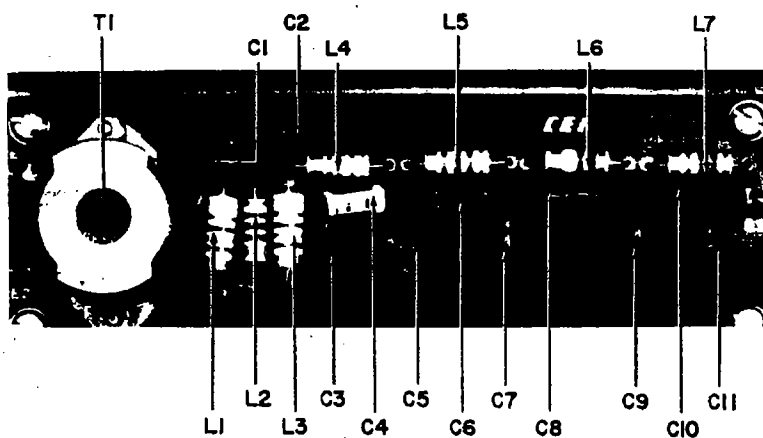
Part 15131 High Band Filter Printed Circuit Assembly (A19A2), Component Locations
